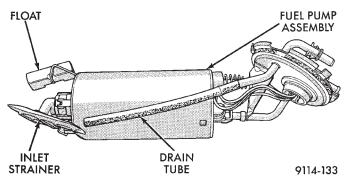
Fuel Pump/Level Unit—Front Wheel Drive
